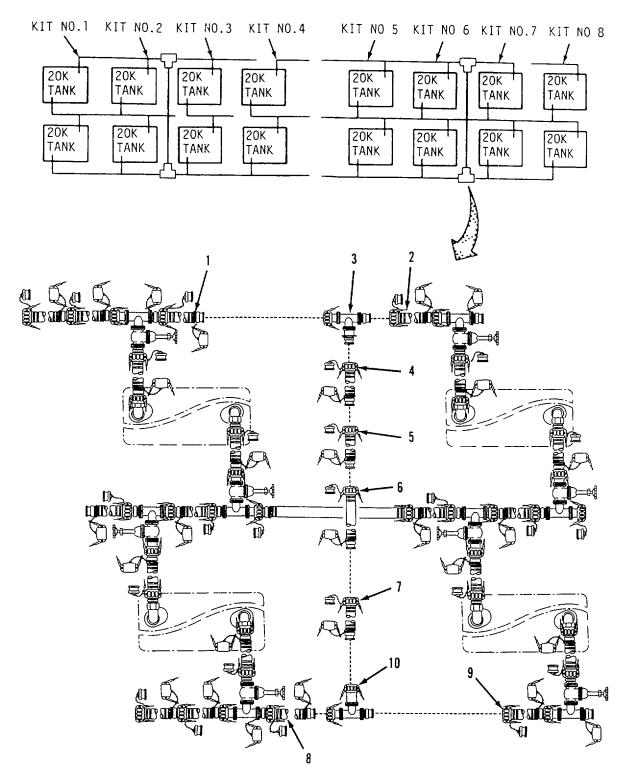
Interconnection Kit Disassembly (Sheet 2 of 2).
